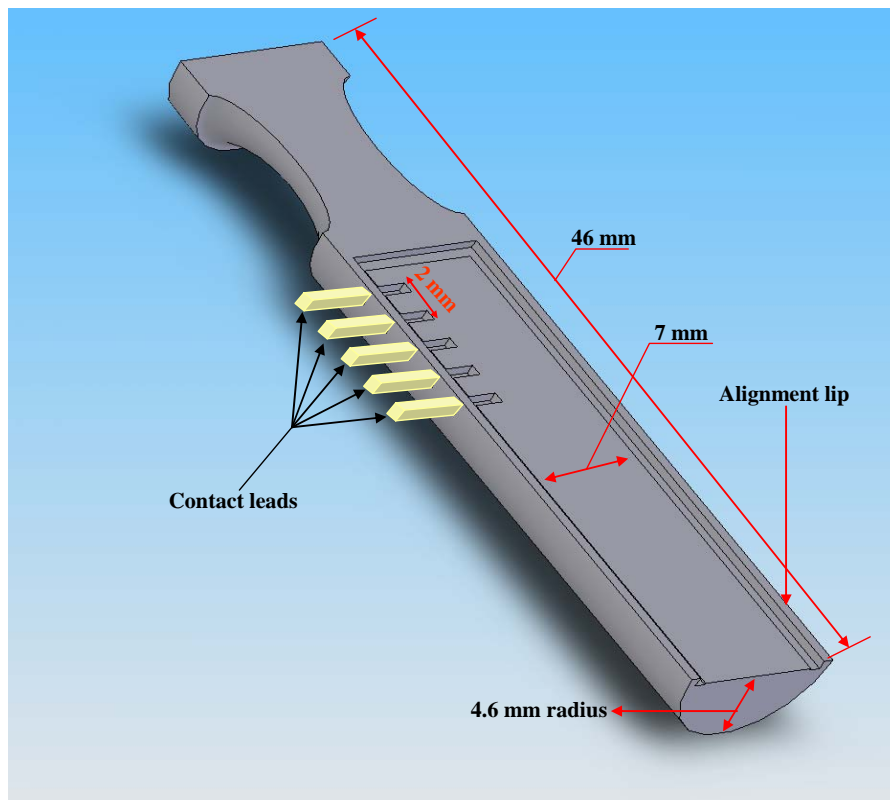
PRO-E[®] model of the package with design dimensions.
